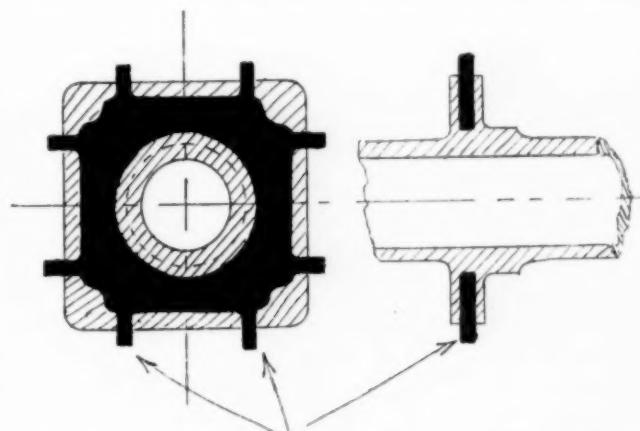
SUGGESTED CHILL FOR FIG. 1; TO BE PREHEATED
